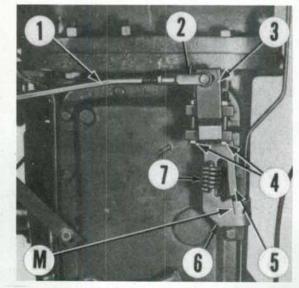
View of parking brake linkage. Refer to text for adjustment.
